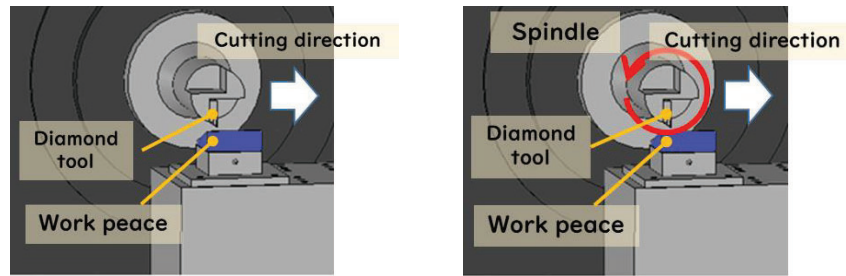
Typical processing methods: Shaper (left), fly cut (right) Shaper is processed with a fixed tool, while fly cut is processed with a rotating tool. Select the method best suited to the workpiece.
